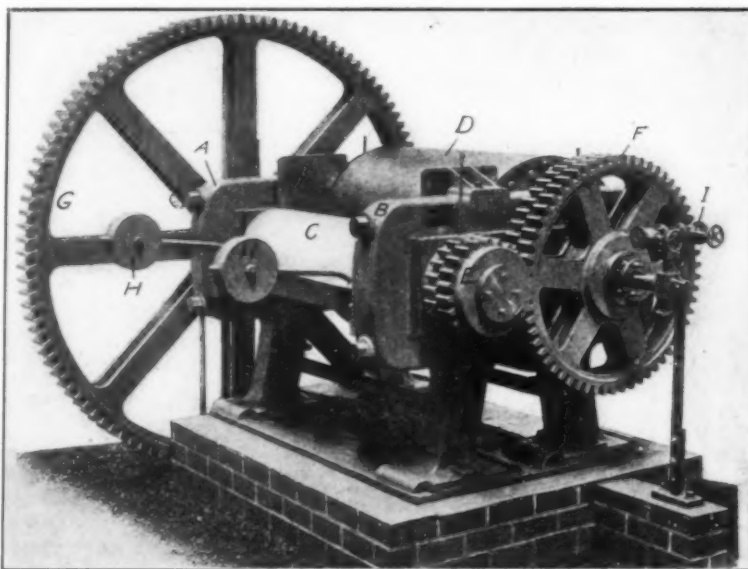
HAUBOLDT'S ITPLATE MILL.
